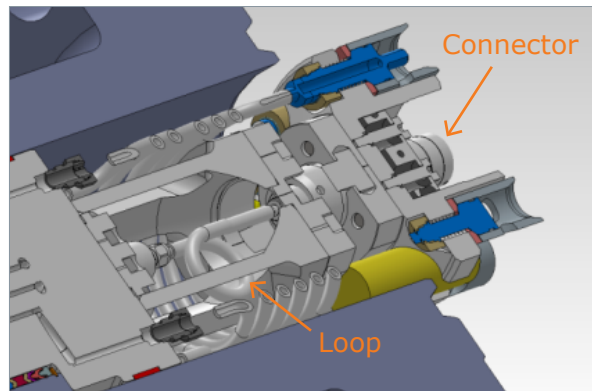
Section cut of Hybrid Penetrator showing hydraulic lines. [5], [6]
